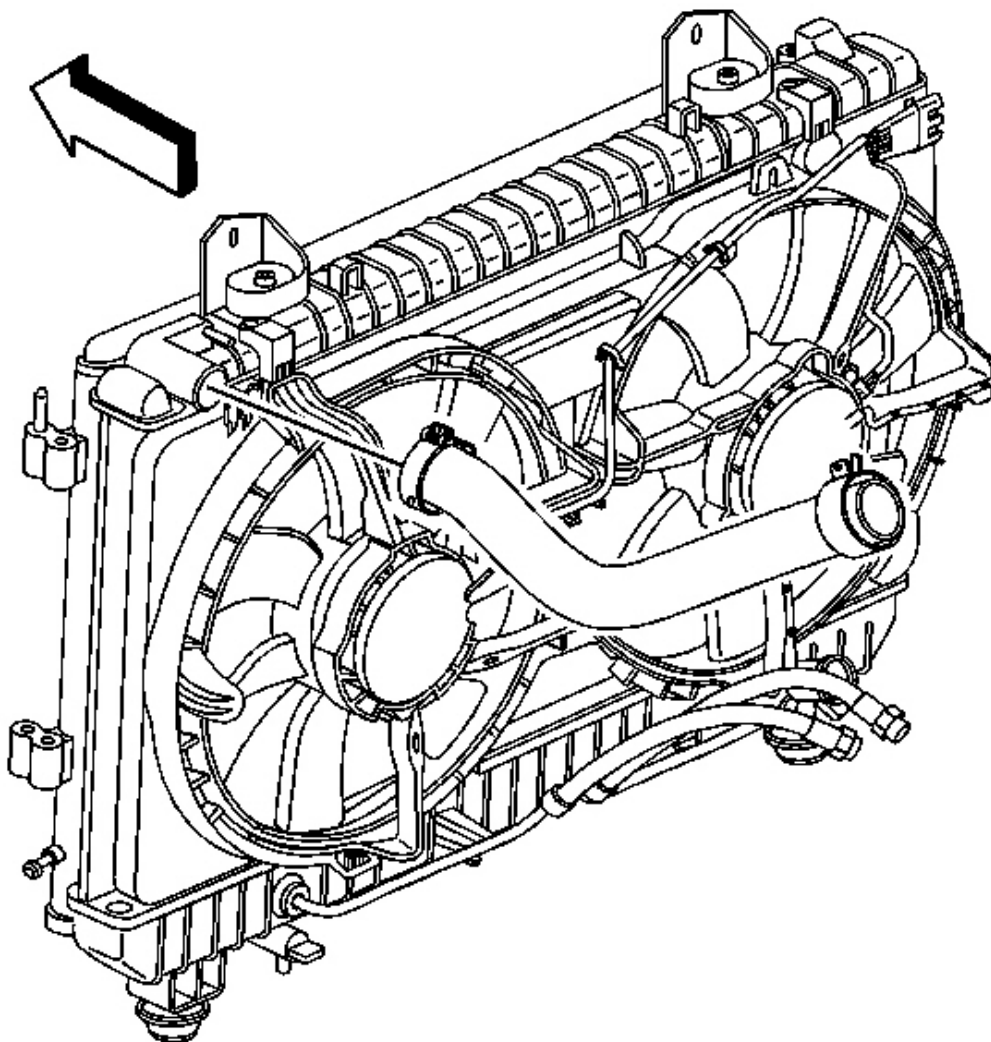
Radiator Inlet Hose & Clamp At Radiator
